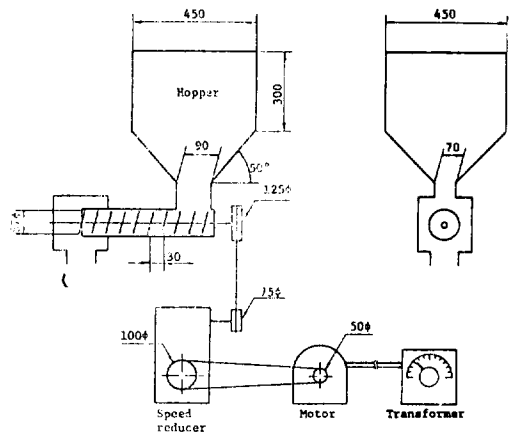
The block diagram and dimensions of driving and feeding equipments.
